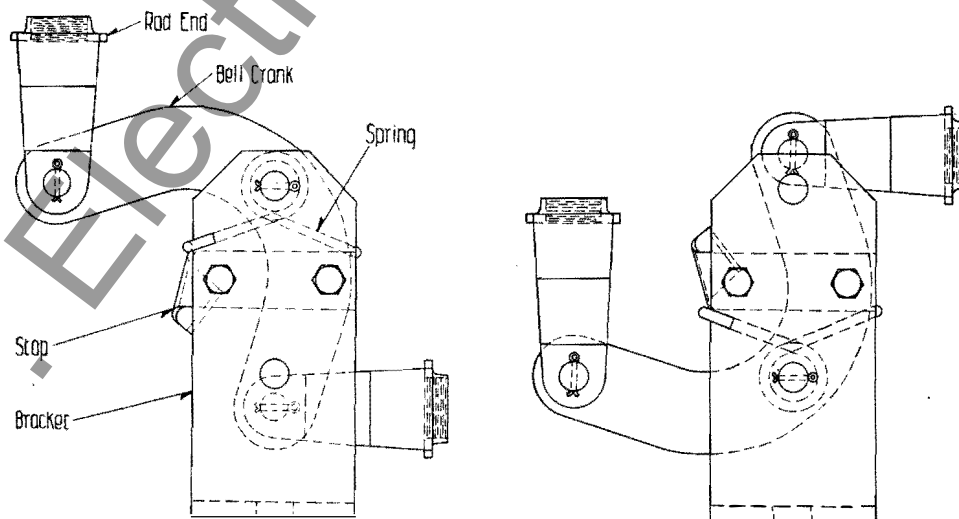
ACCELERATING DEVICE SHOWING ASSEMBLY FOR ABOVE AND BELOW FLOOR MOUNTING
